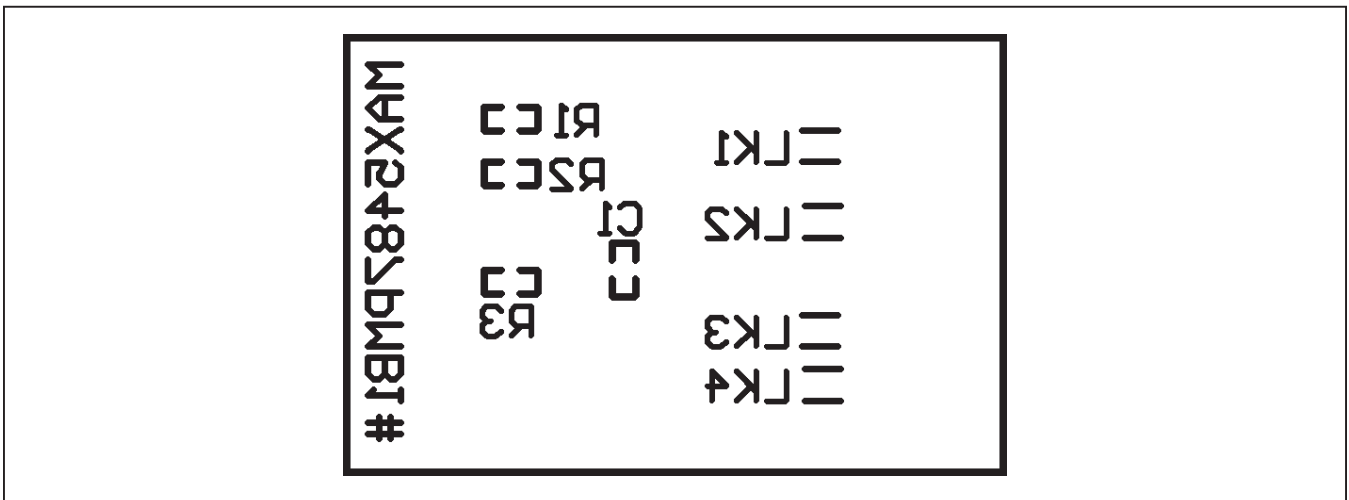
MAX5487PMB1 Peripheral Module Component Placement Guide—Solder Side
